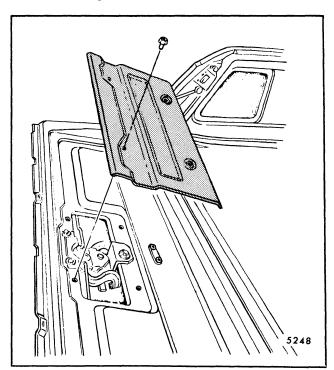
Tail Gate Inner Panel Access Hole Cover
